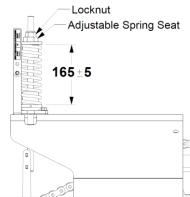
Primary chain tensioner spring setting (540 RPM driveline)
